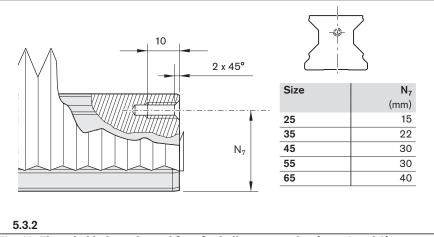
Threaded hole at the end face for bellows mounting (type 1 and 2)
